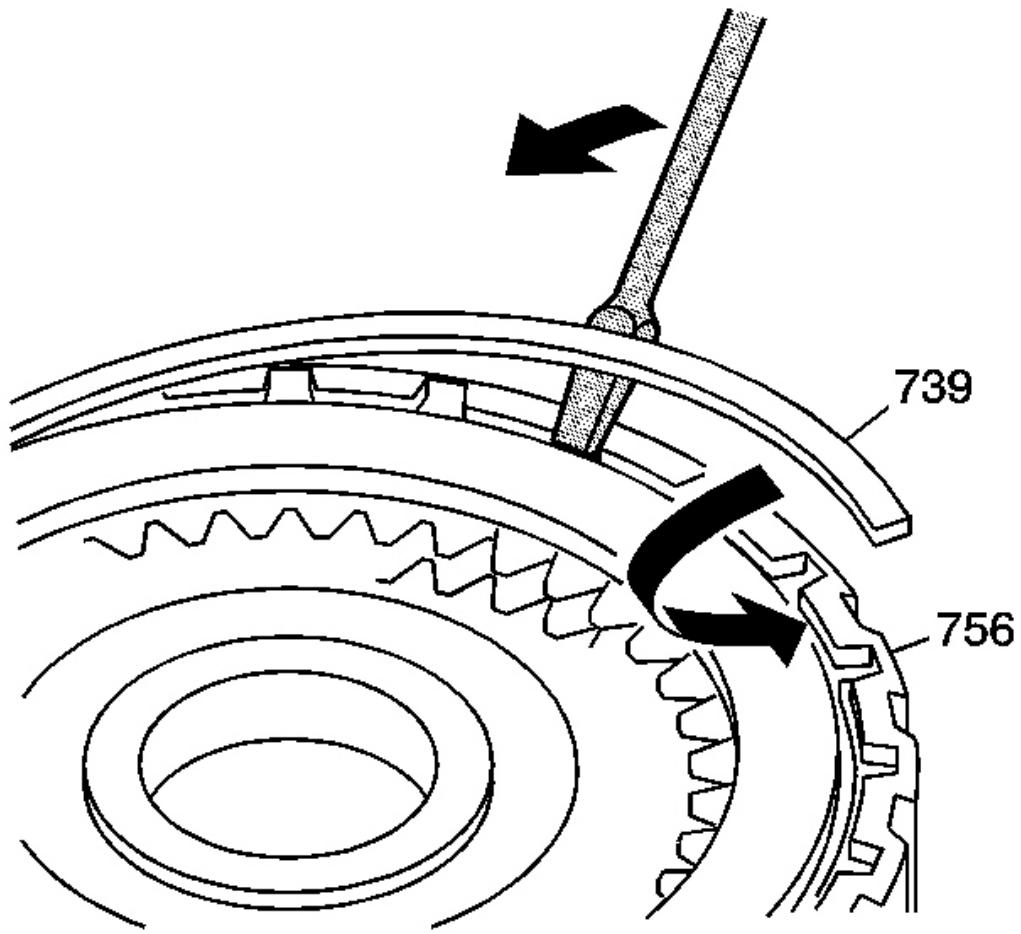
Installing The 129 mm 2nd Clutch Backing Plate Retaining Ring Into The Groove In 2nd Clutch Housing Using J 28585
